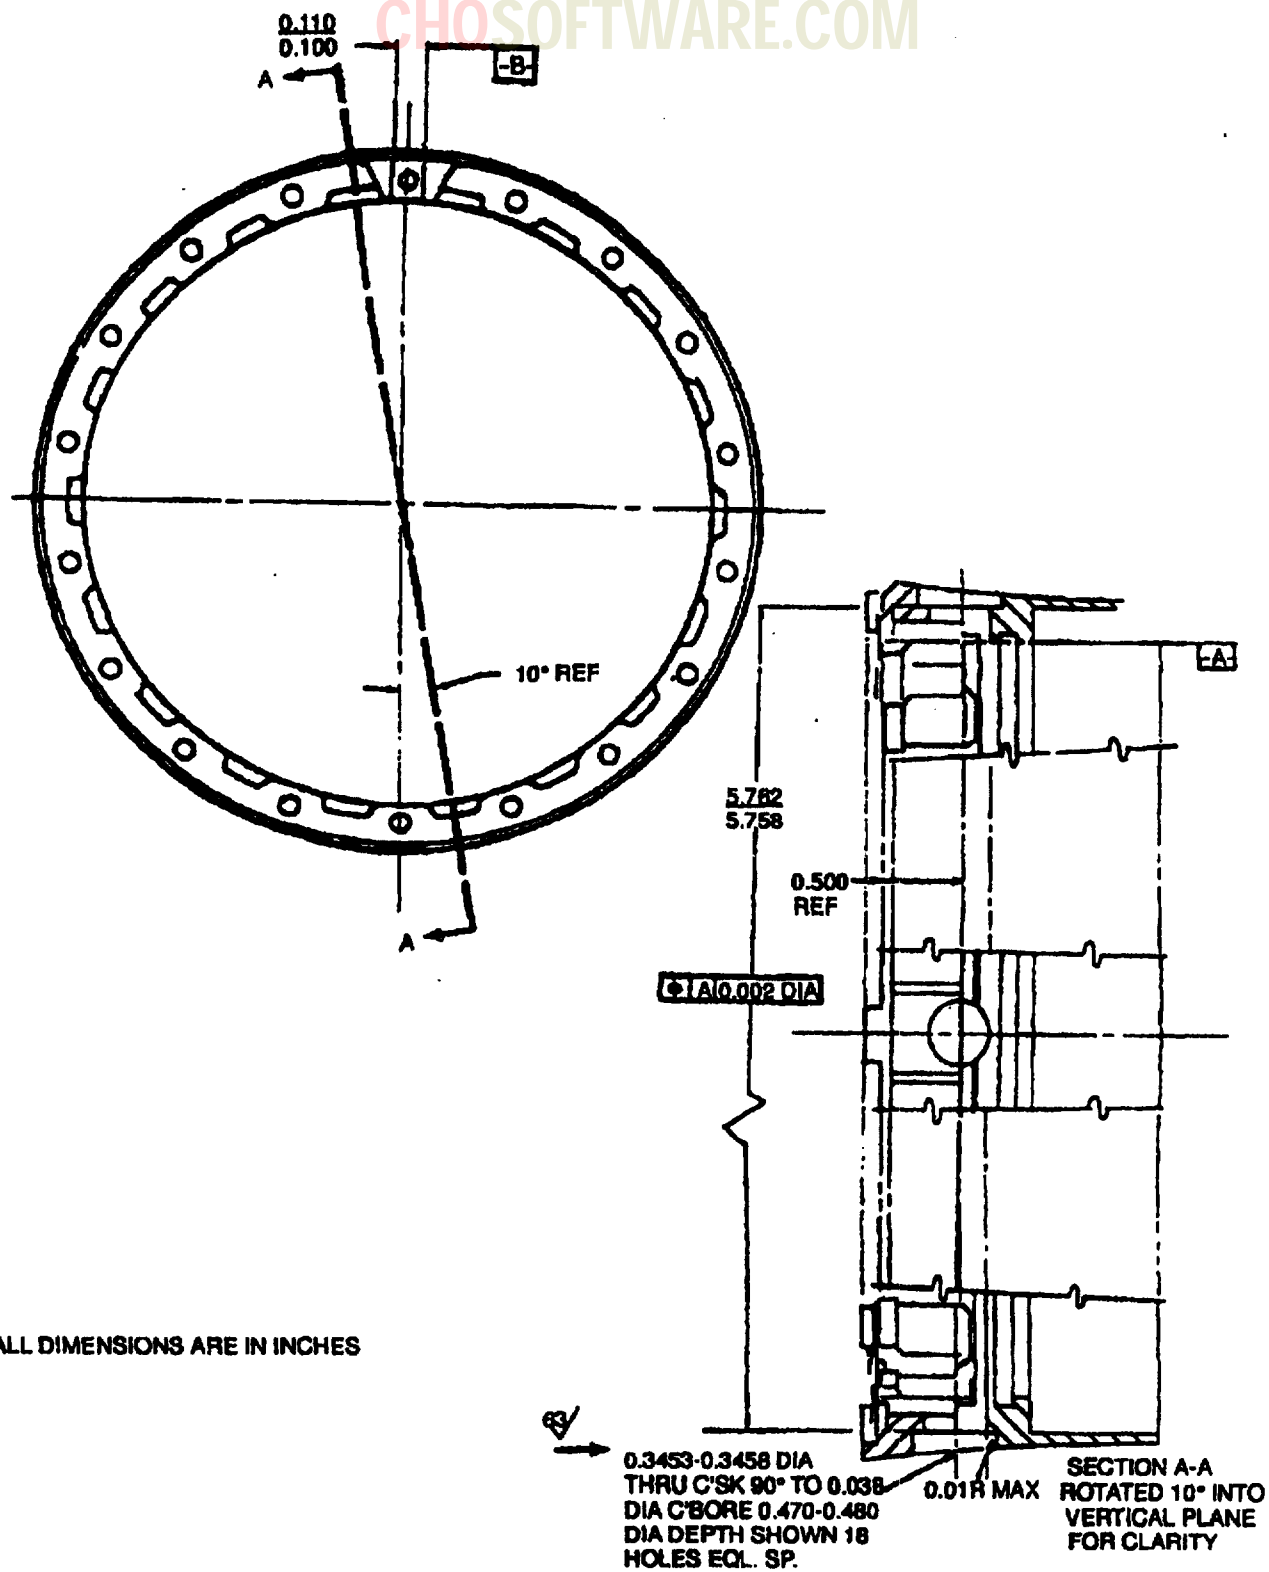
Inner Rear and Forward Fairing Bushing Repair.
